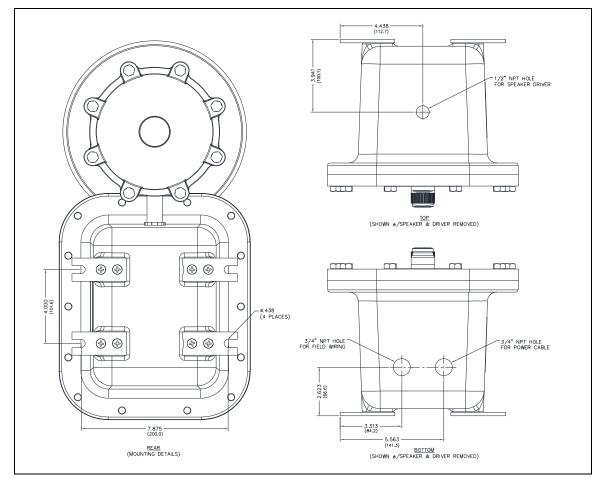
Model 400-005/400-006 Mounting Detail and Conduit Entries
